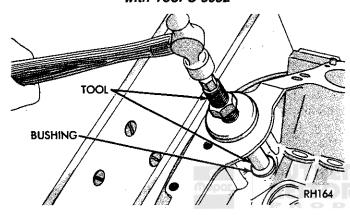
Installing Distributor Drive Shaft Bushing with Tool C-3053
